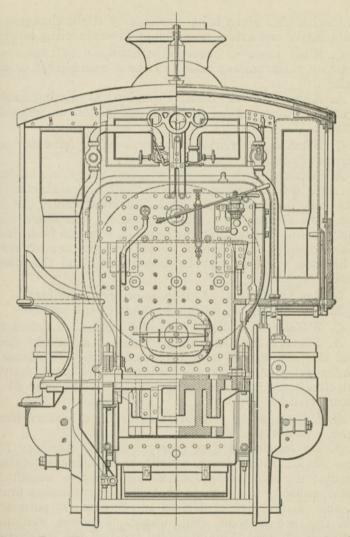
Rear View, and Part Section through Cab, Pennsylvania R. R. Engine, Class "O."
